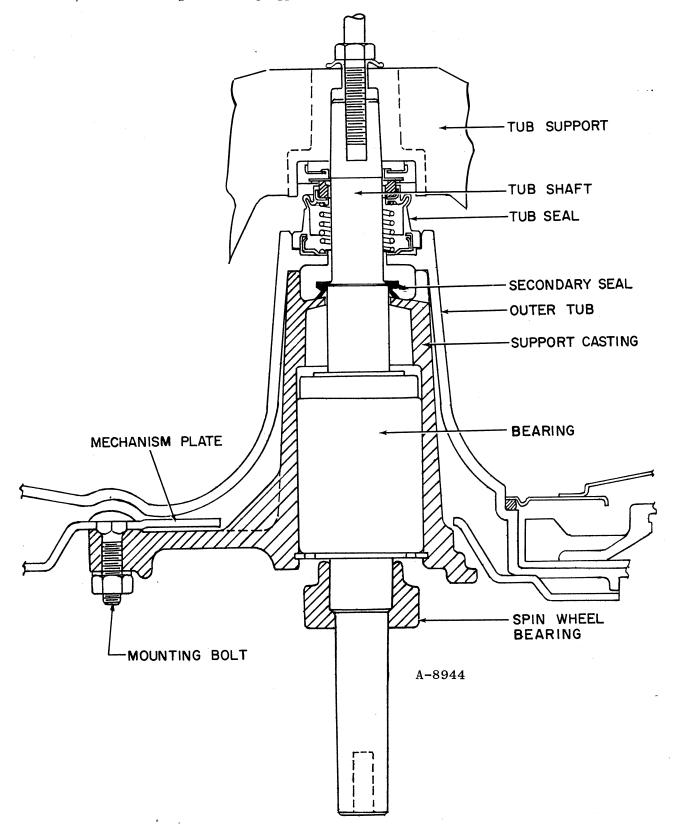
Sectional View of Revised Assembly Showing Tub Seal and Support
